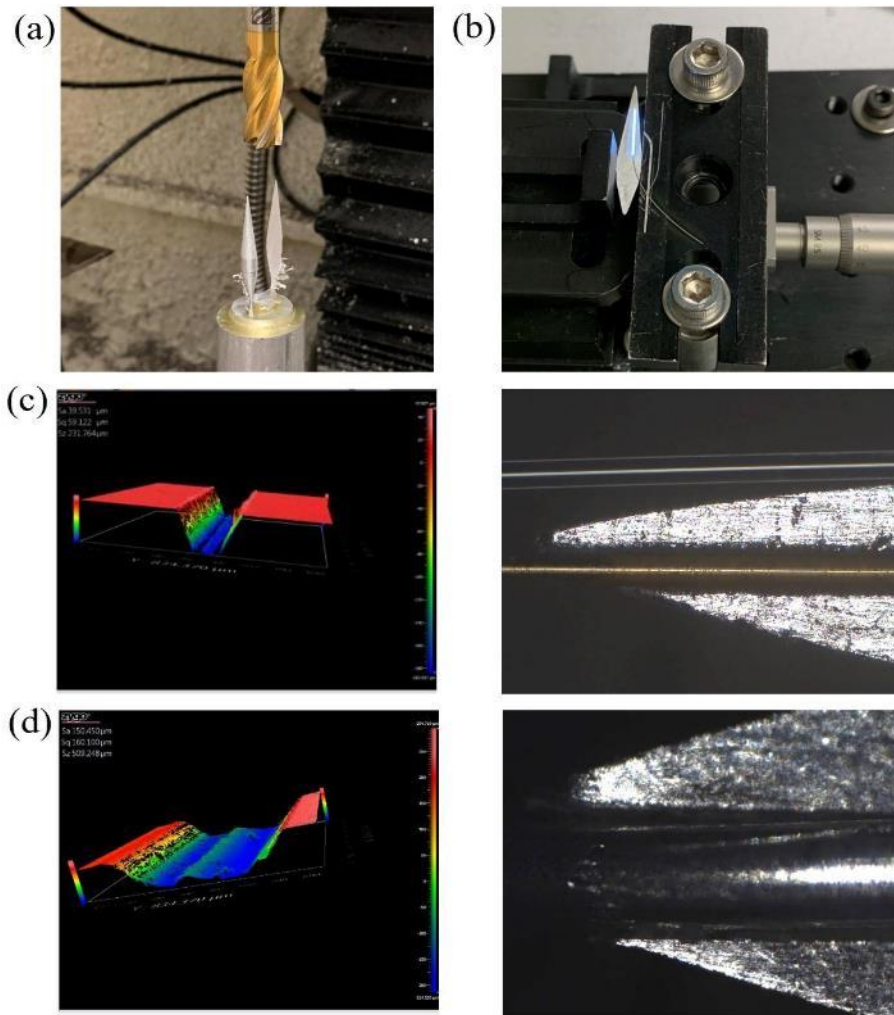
(a) CNC machining (b)Slot engraving by laser marker. Surface profiler image of the slots on the front (c) and back horn (d) respectively.
